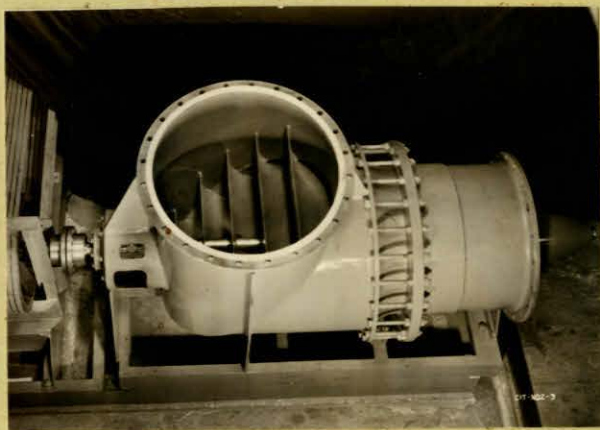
Tunnel Circulating Pump View Showing Vaned Inlet Construction.
